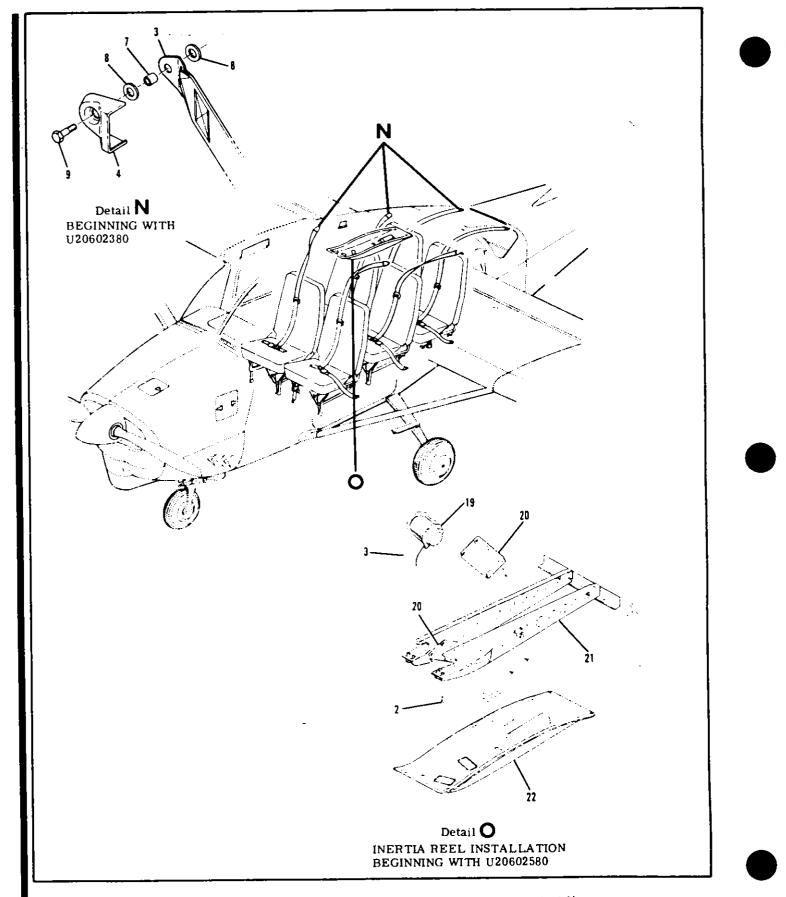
Seat Belt and Shoulder Harness Installation(Sheet 3 of 3)
